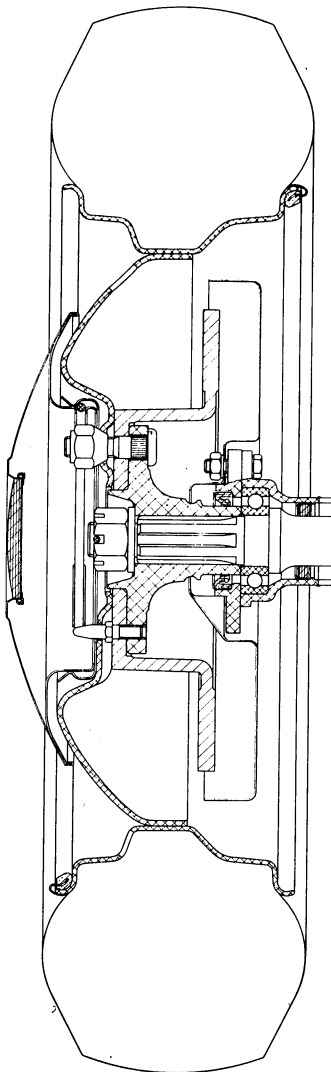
Sectional view of a rear wheel across hub and brake disc (1600 S Cabriolet).
